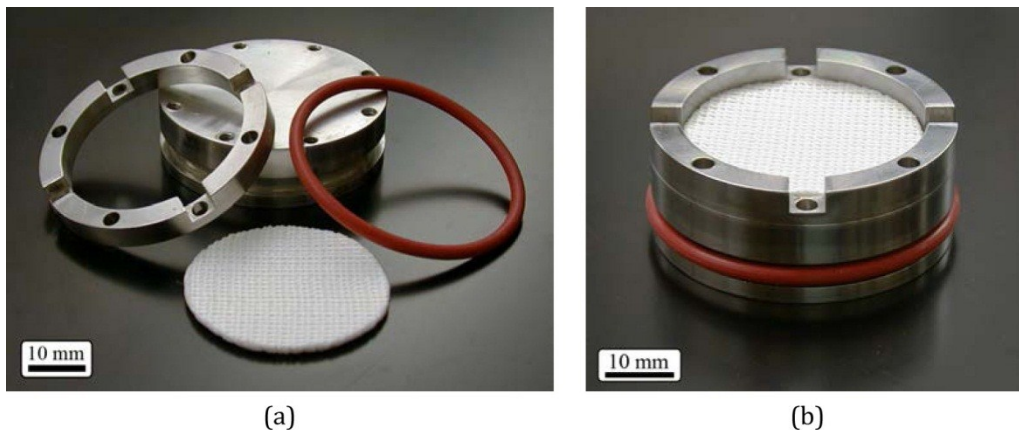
(a) From left to right, the retaining ring, metal puck, fabric sample and O-Ring used for OrthoPOD testing; (b) the assembled fixture.
